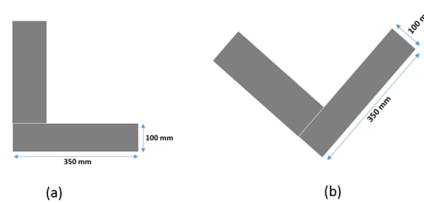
Fillet weld configurations where a) is the PB welding position and b) the PA welding position
